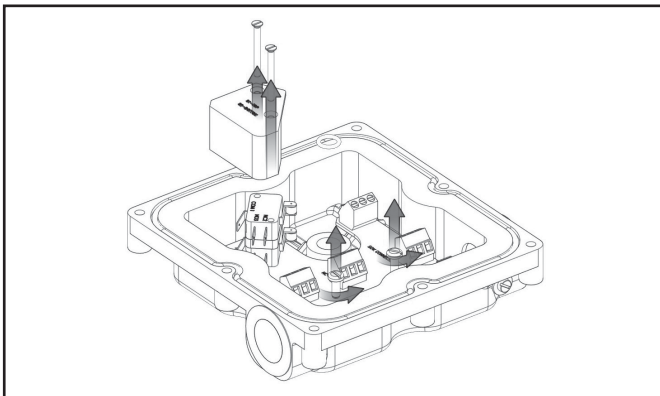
Removing the PCB and switch cover of 01, 11 switches
